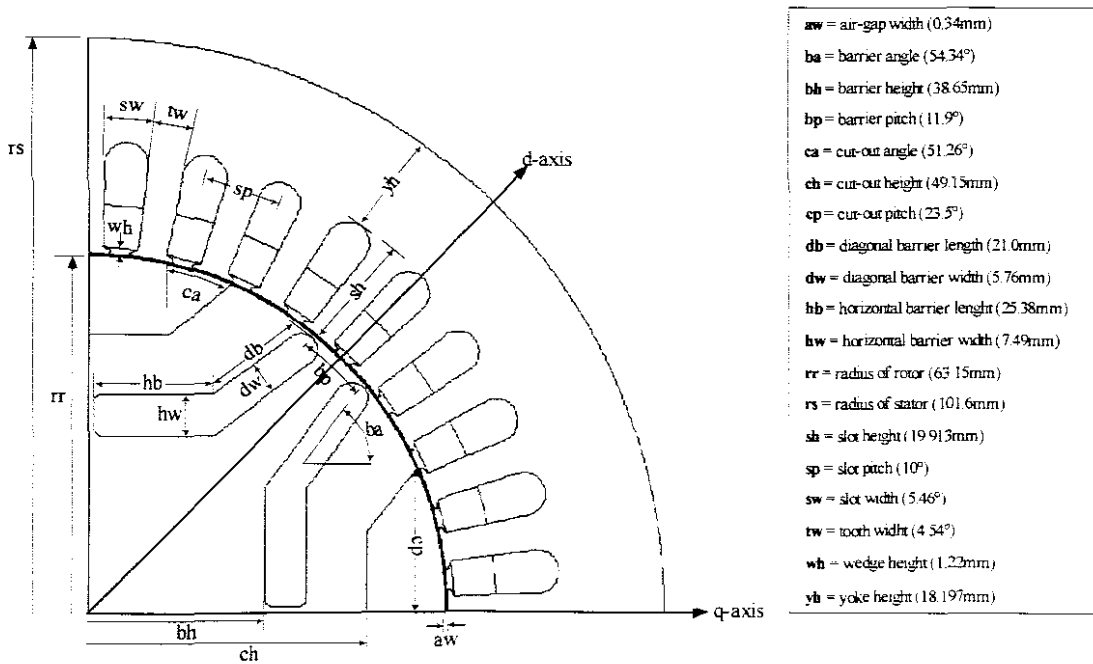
Cross-sectional view of original RSM with given dimensions
